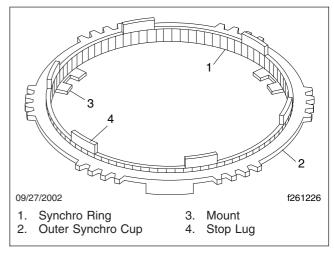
, 4th Gear Synchro Ring and Outer Cup
